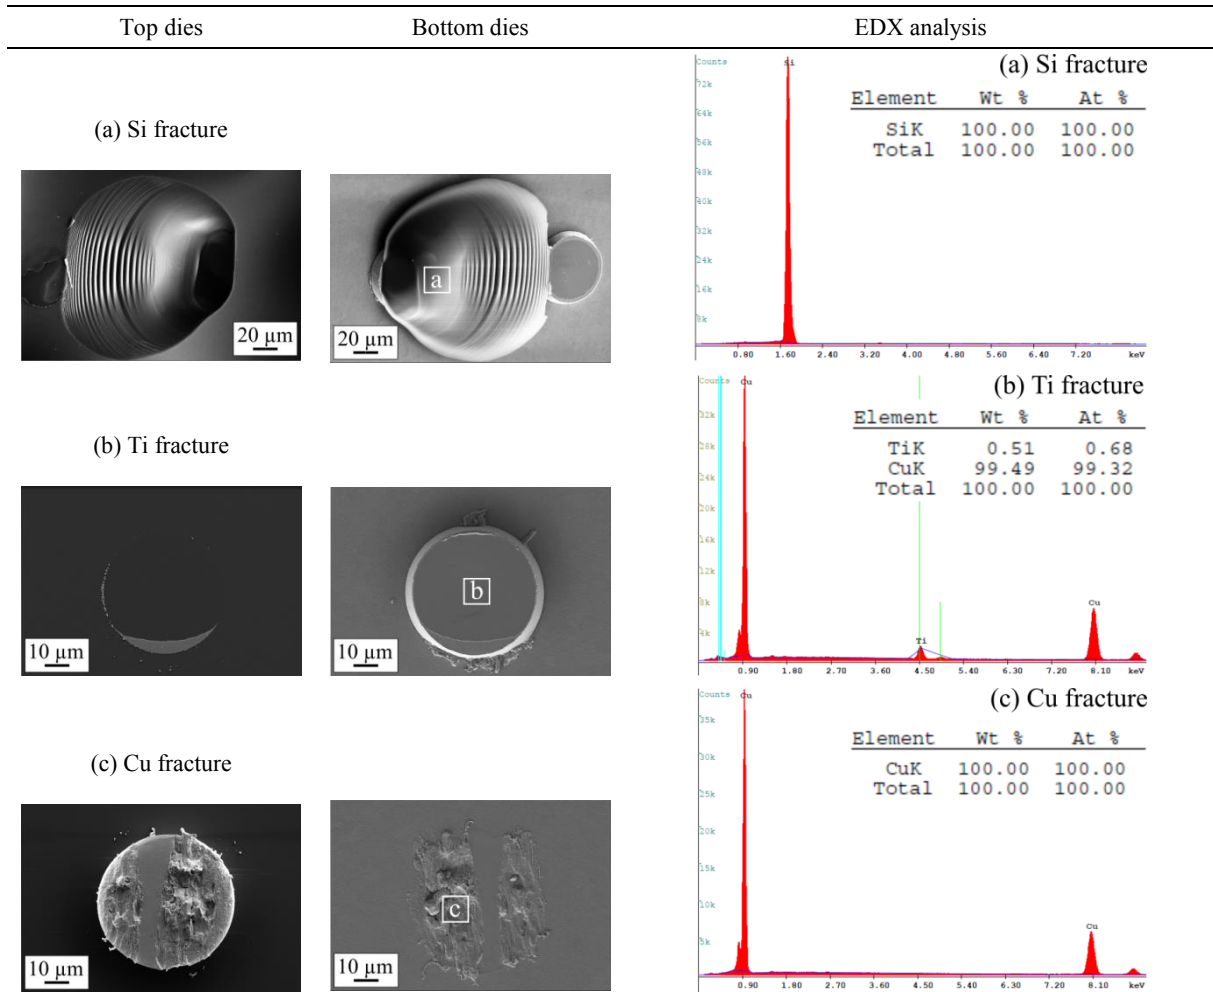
Fracture surface types after shear strength tests by SEM and EDX: Si fracture (a), Ti fracture (b) and Cu fracture (c)
